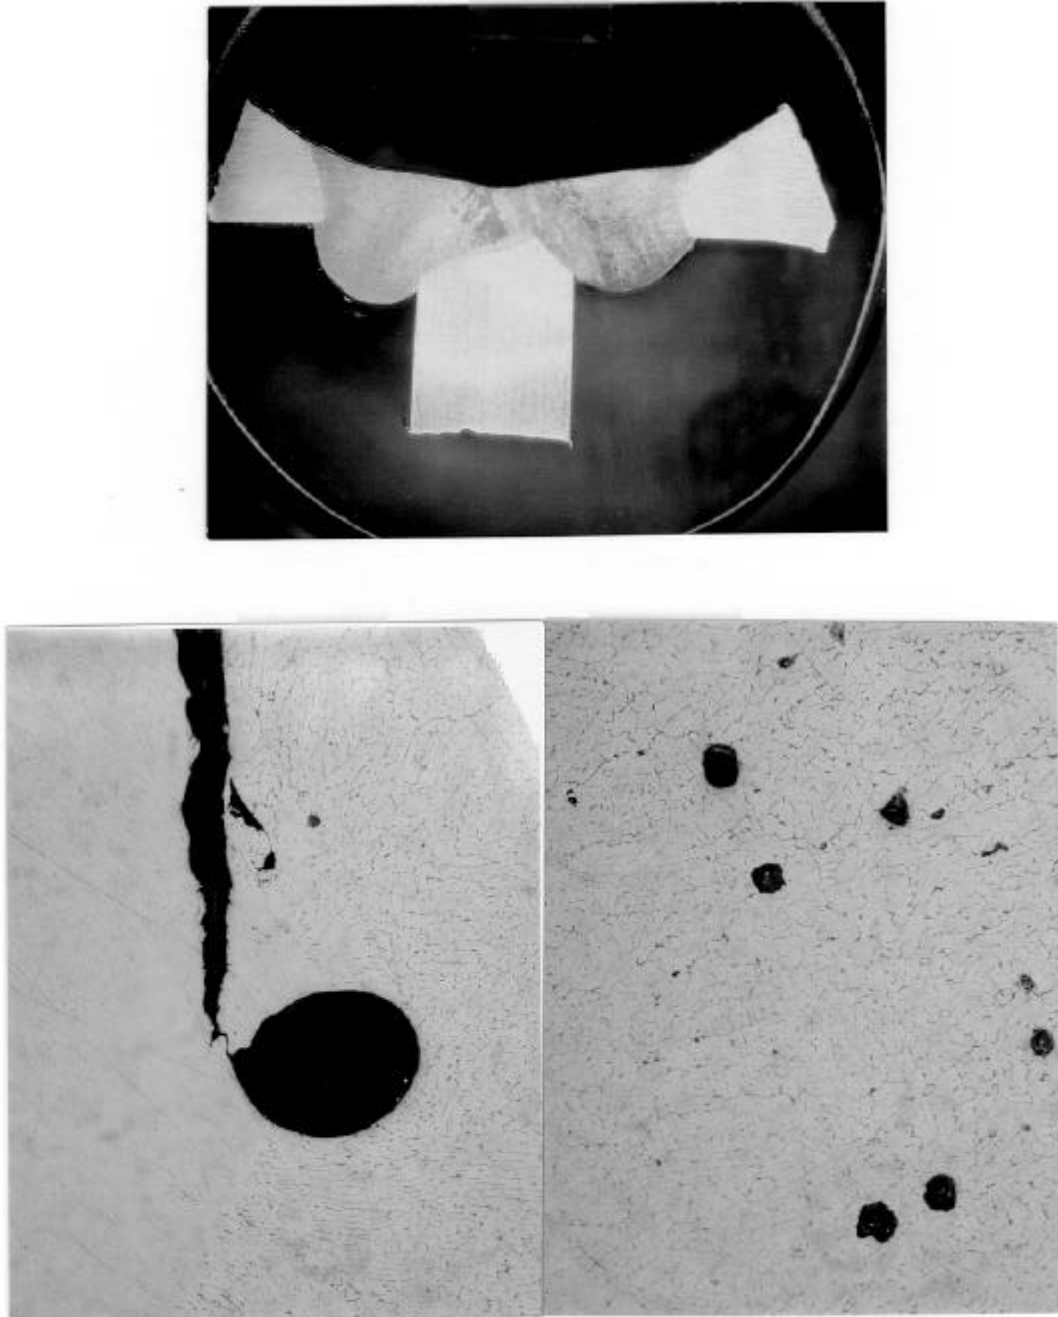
Nosmas 2nd plug weld. (magnification: top 5x, bottom 100x)
